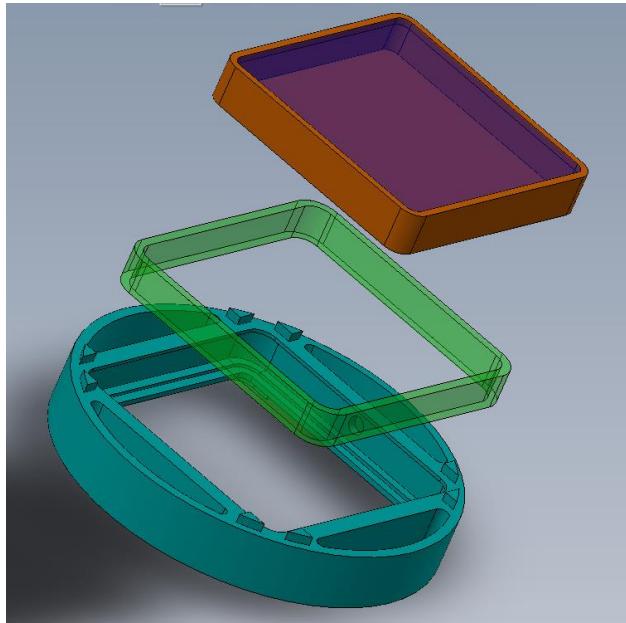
Payload unit, expanded view. Top to bottom: Petri dish, lighting (LED strip), stackable holder.
